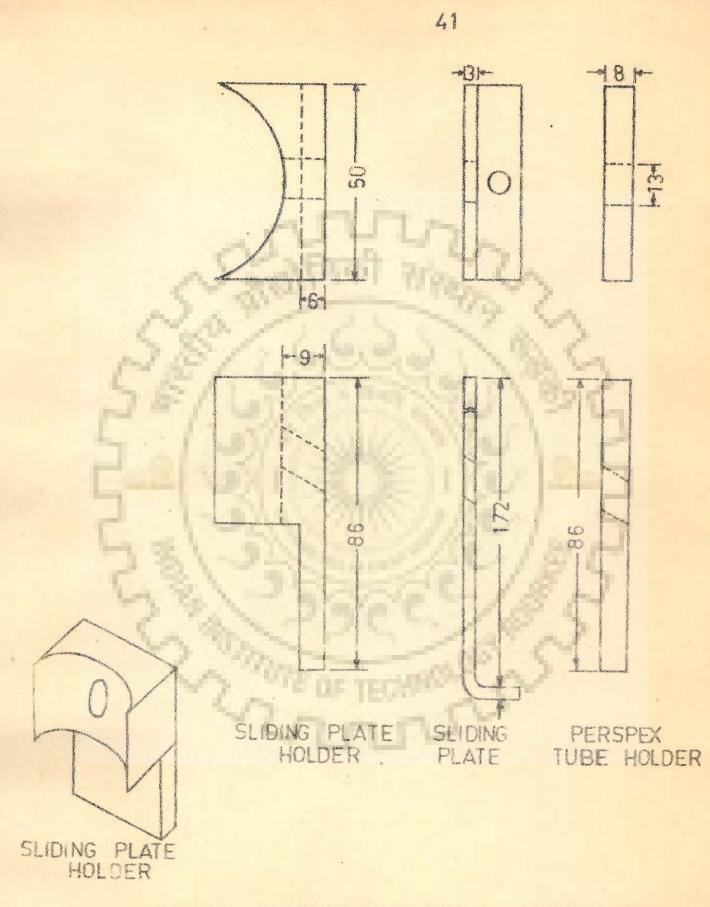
DETAILS OF OUTLET CONNECTIONS
